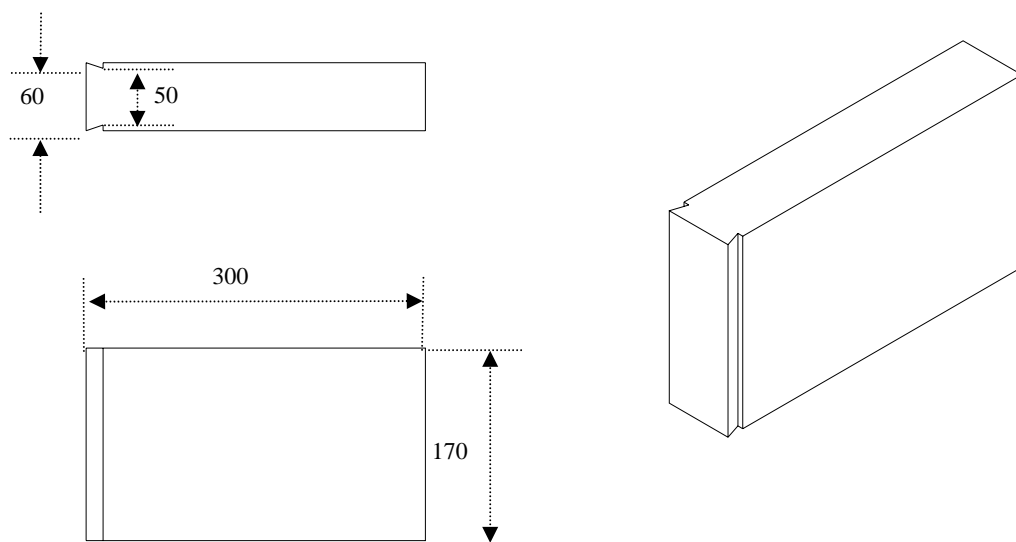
Test specimen dimensions of Part 7 and 8 (in mm)
